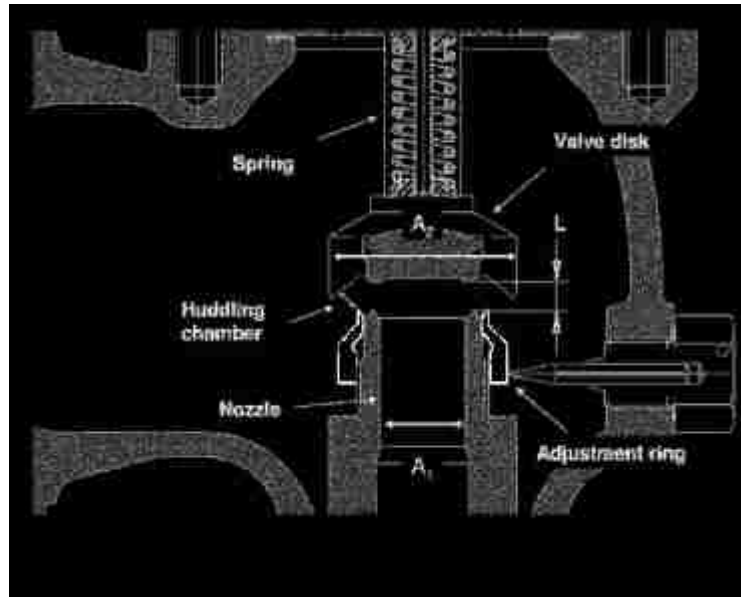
Detailed view of nozzle and valve disc [2]
